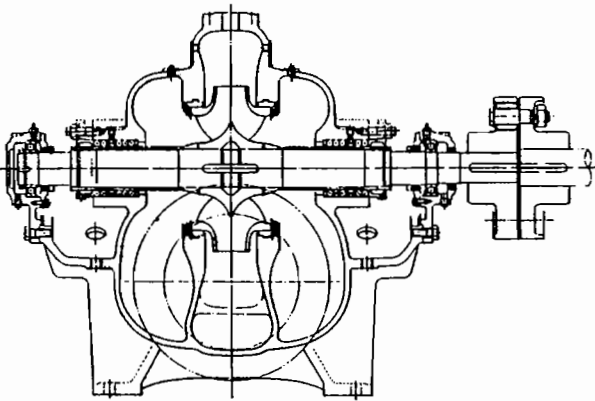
Sectional Drawing of Double Suction Volute Pump.
